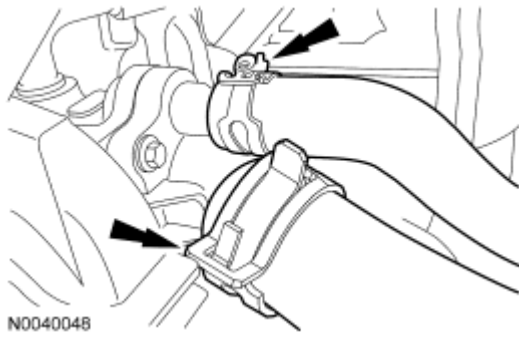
Locating Lower Radiator And Heater Hoses From Thermostat Housing
